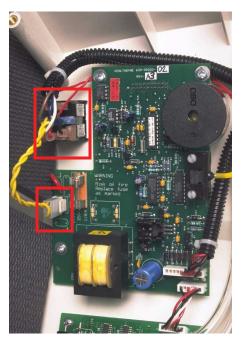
FIGURE V: MAIN PCB (J2) AND POWER SWITCH LOCATION
